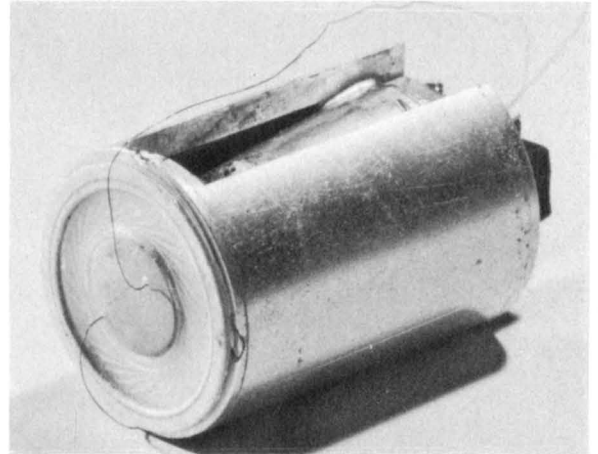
Complete motor assembly consisting of the diaphragm, mechanical resistance and motor.
